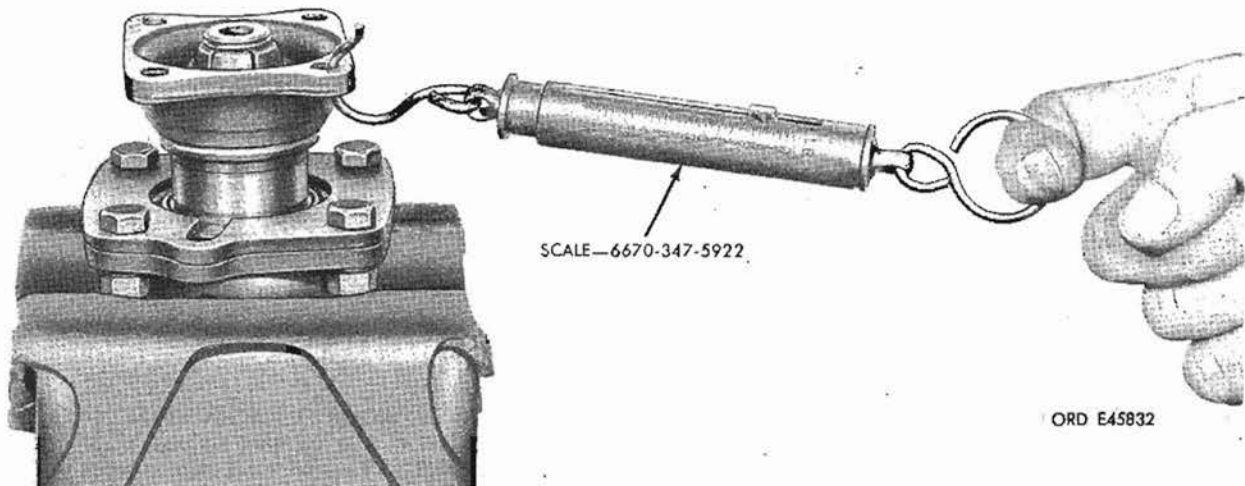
Checking preload on drive pinion bearings, using scale - 6670-347-5922.
